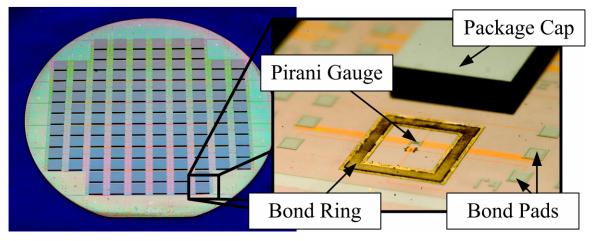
Photo of Ni-Sn TLP solder bonded wafer. Inset shows a magnified view of a package cap, bond ring, and a polysilicon Pirani gauge.
